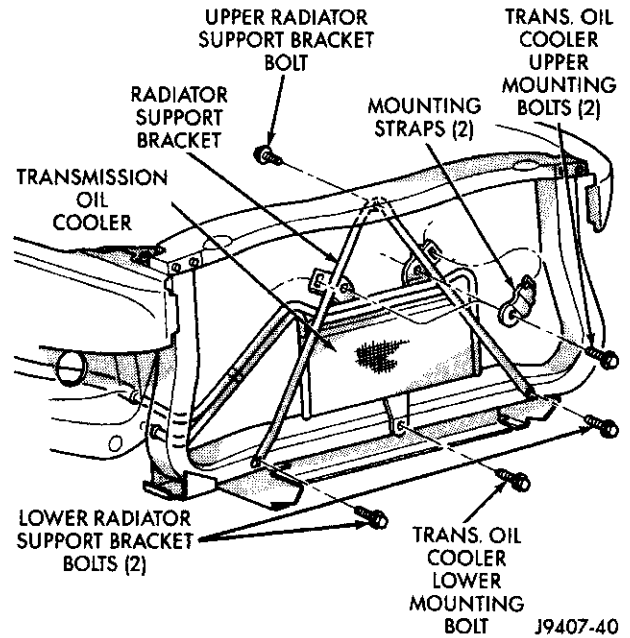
Auxiliary Transmission Oil Cooler—3.9/5.2/5.9L Engines
